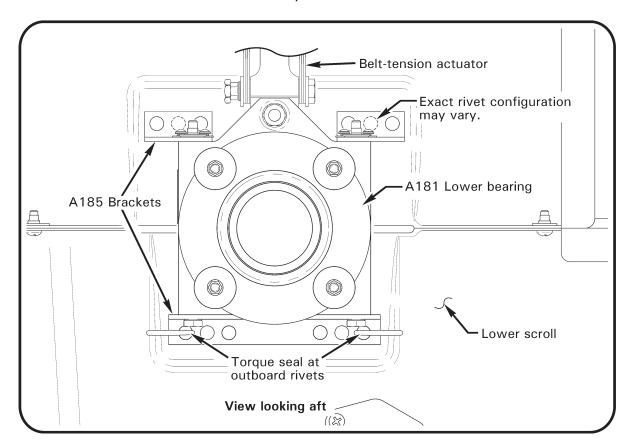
D ACTUATOR LOWER BEARING A185 BRACKETS
